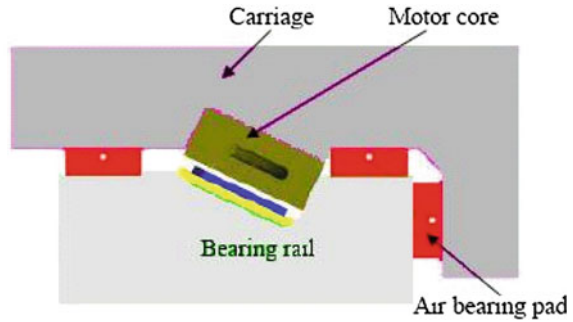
X-Y Feed drives of micro machine tool [7]
